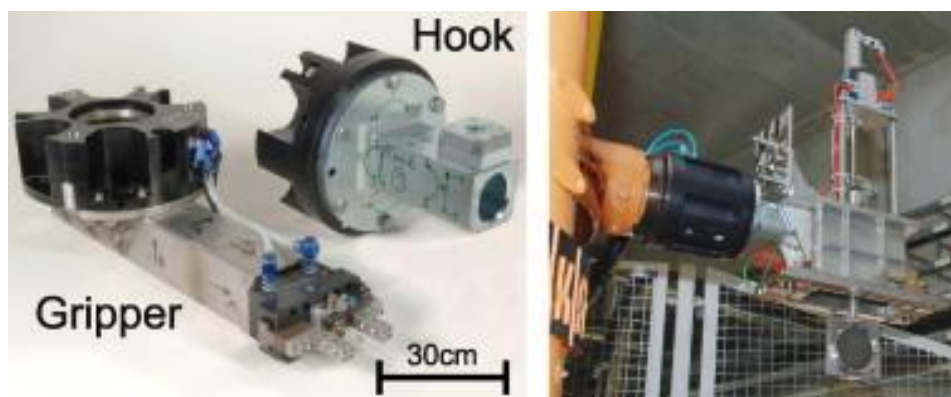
Hook and gripper tools for the Super-FRS (left); KUKA KR350 removing and transporting a vacuum window from a vacuum chamber using a hook tool (right) [3].
